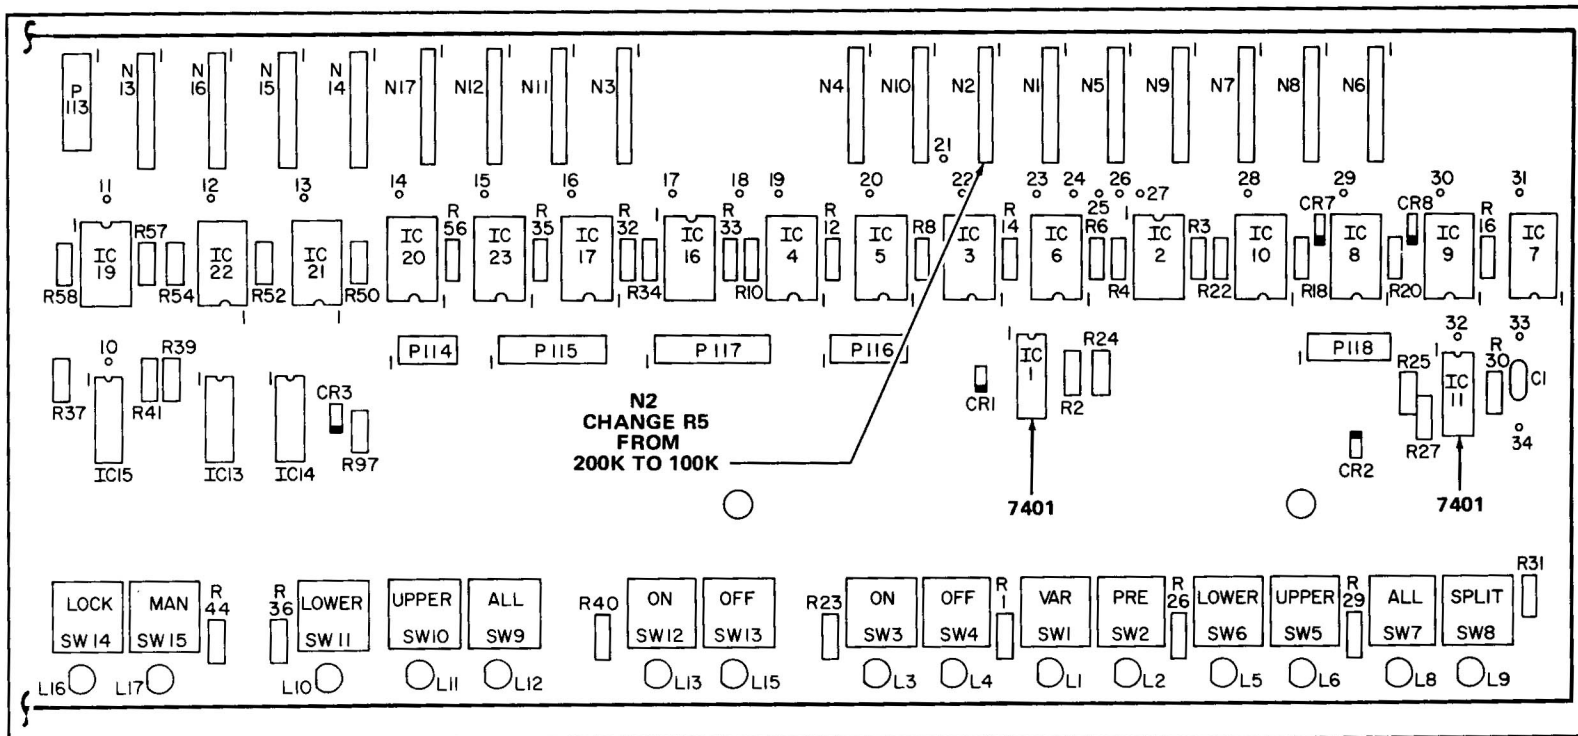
RIGHT HAND CONTROL AND MASTER PRESET PRINTED CIRCUIT CR BOARD 11 (POLYMOOG)
